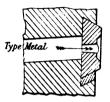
Linotype; pump-plunger. Scale; half size.
